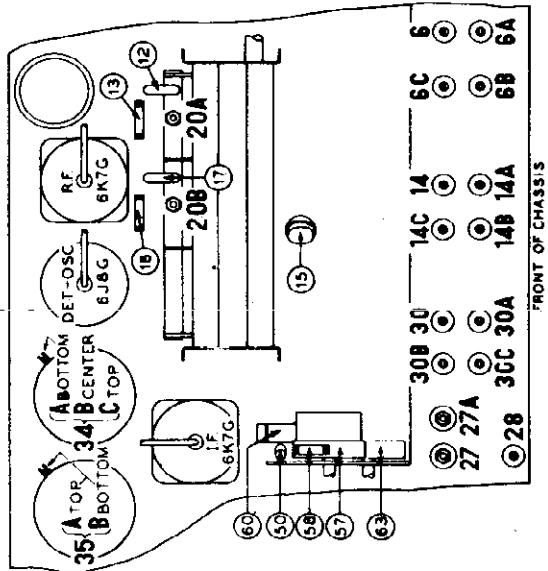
Compensator Locations: Top, Front View of Chassis.
